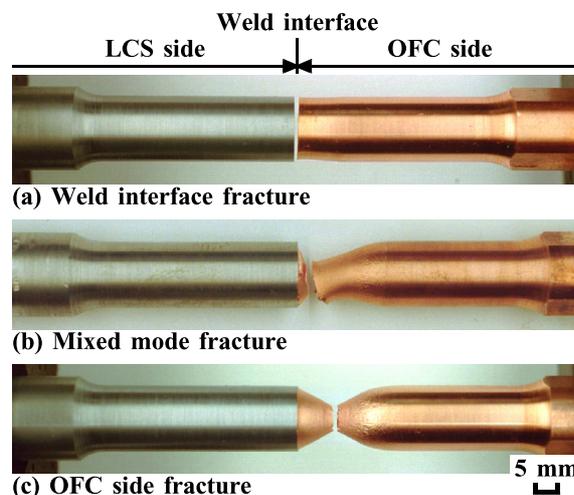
Example of joint tensile test specimens appearance of joint at various forge pressures after tensile testing; friction pressure of 30 MPa.
